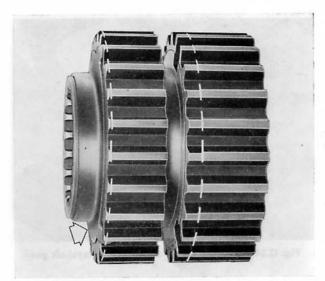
First speed clutch and reverse gear hub on a three-speed transmission. The arrow indicates the sliding key retaining plate. The extent of the stepped part is between the white lines
